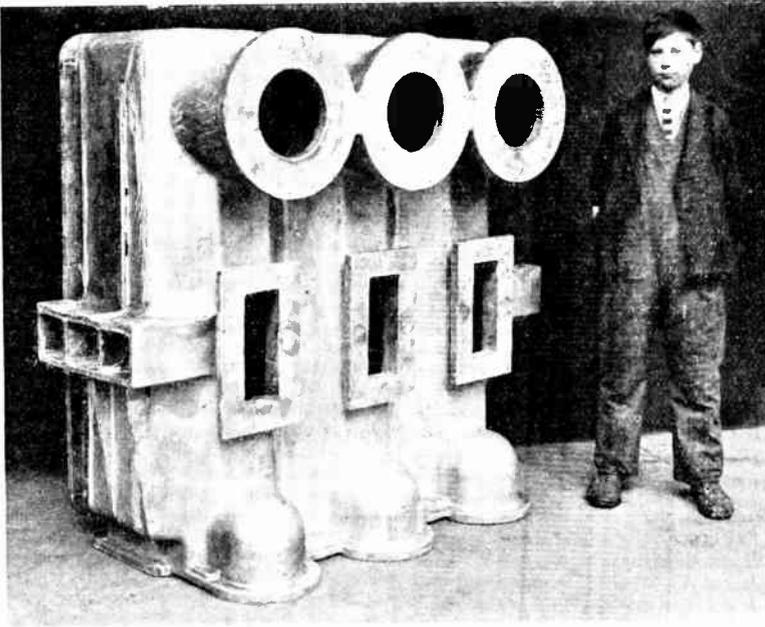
A HUGE ALUMINIUM ALLOY CASTING.
